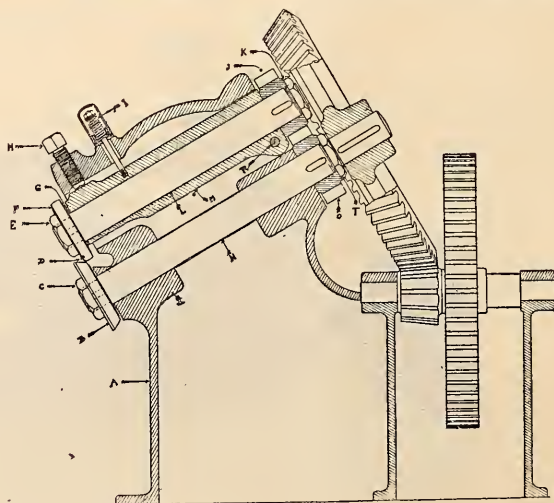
SECTIONAL VIEW OF LENNOX ROTARY BEVEL SHEAR.
